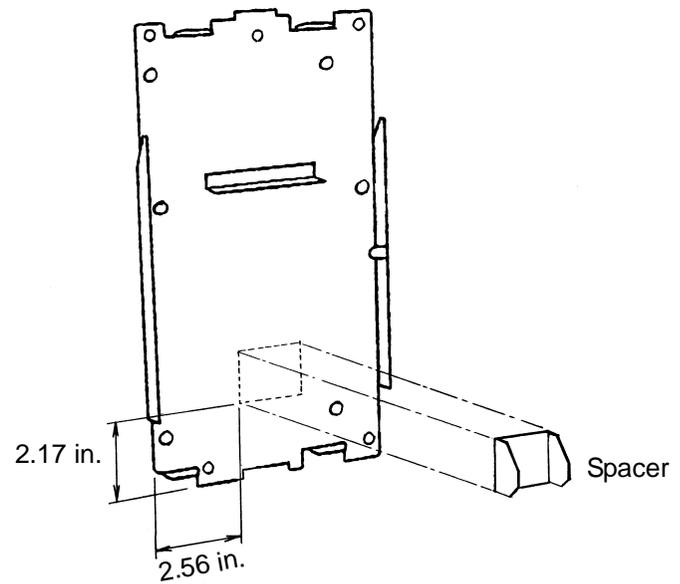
Attaching the Wall Mount Bracket with Spacer
